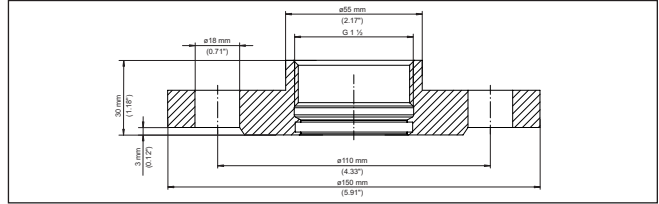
Dimensions of threaded adapter G1½ (DIN 3852-X) on flange DN 40 (EN 1092-1, Form B1) PN 40
